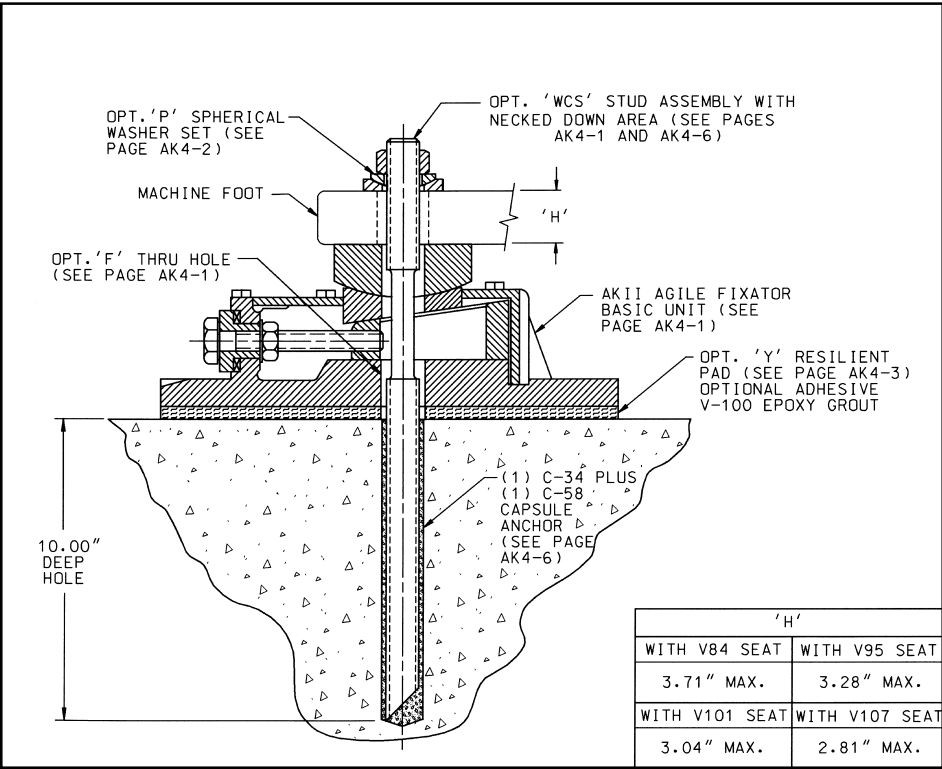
CENTER CAPSULE ANCHOR STUD
